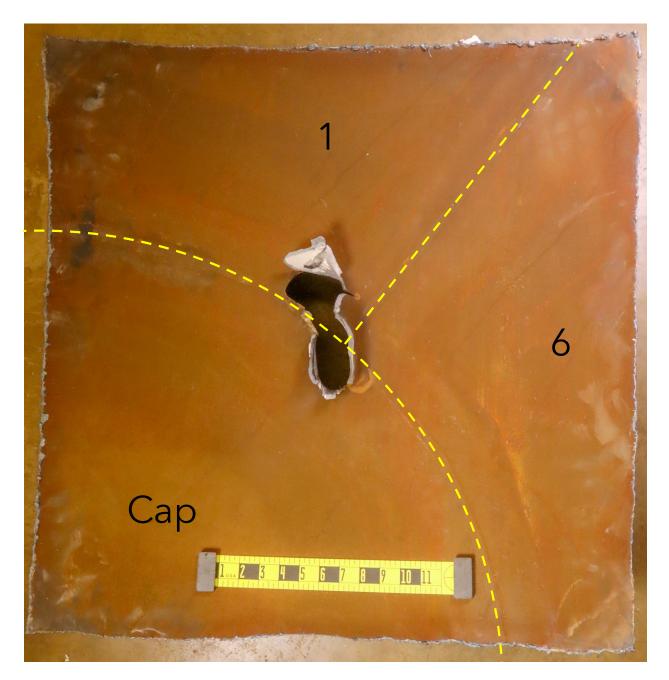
Similar view to Figure 9 with yellow dashed lines showing the approximate location of the butt weld deposits joining segments 1, 6, and the cap.
